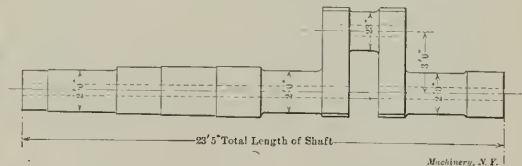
Crankshaft of Large Blooming Mill Engine.
